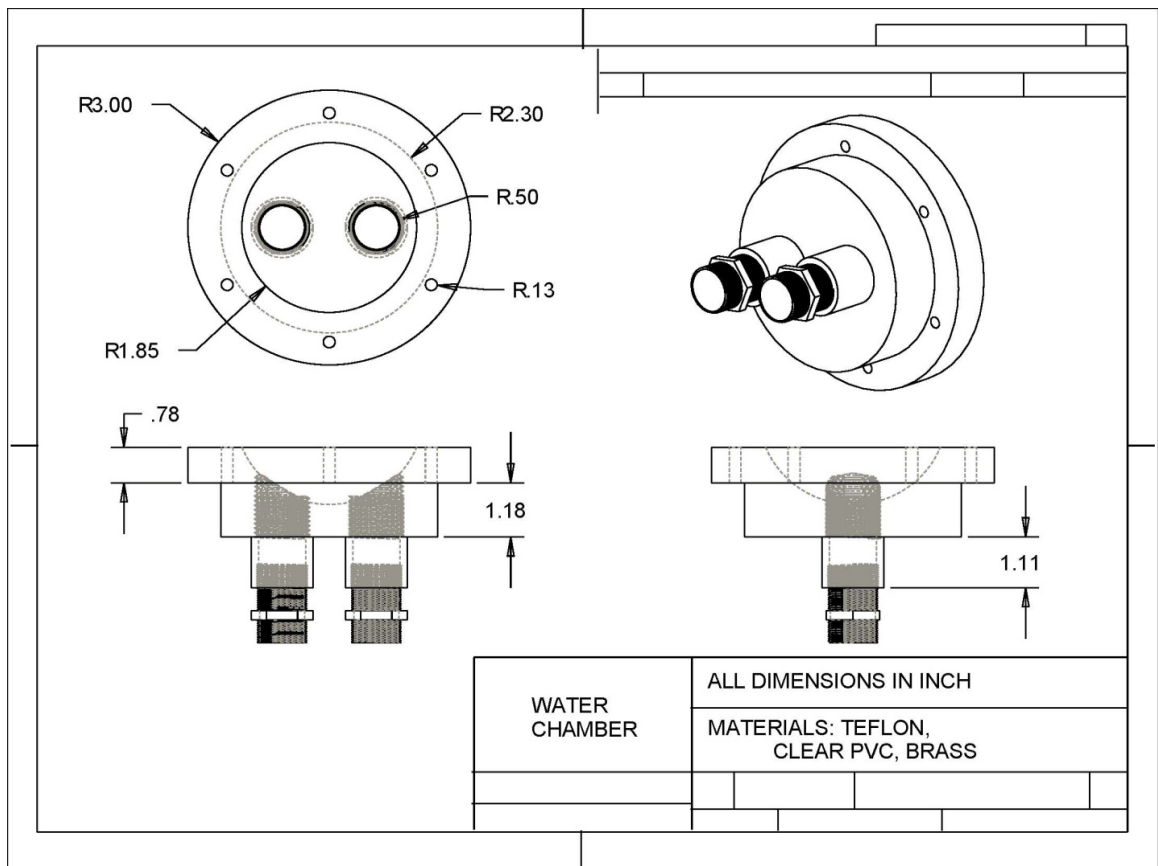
2D CAD model of water chamber with detailed dimensions. Figures are presented as the top, front, right hand and isometric views.
